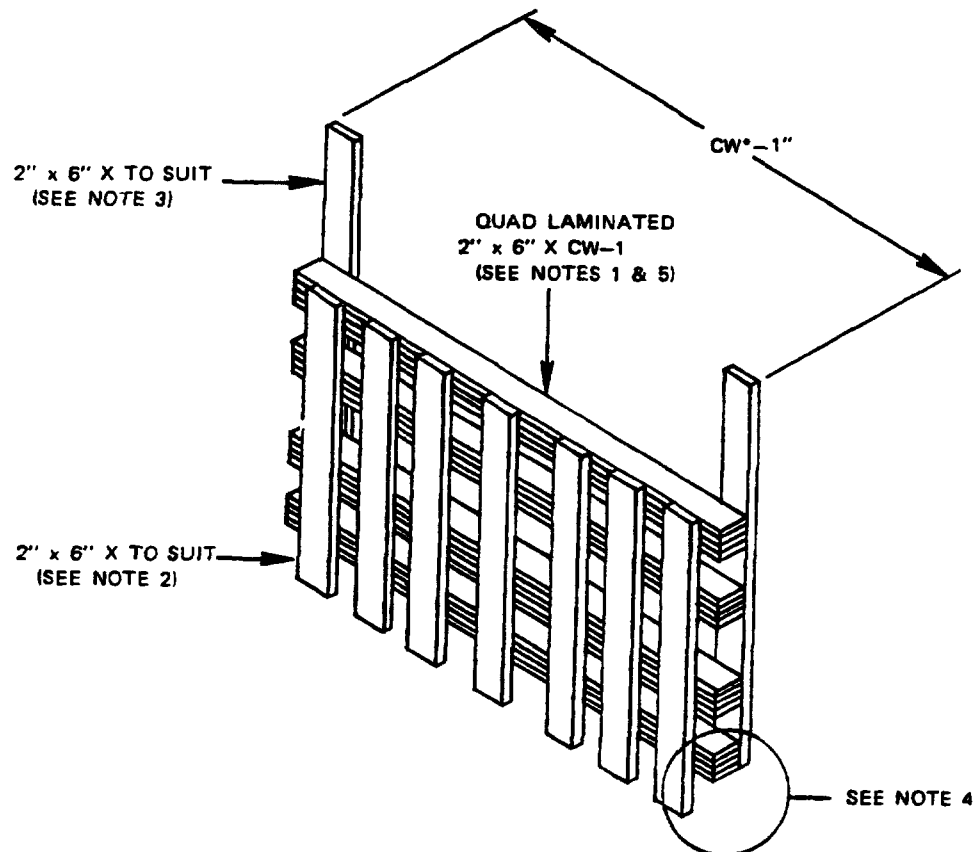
B. Typical front bulkhead with four quad laminated beams.
